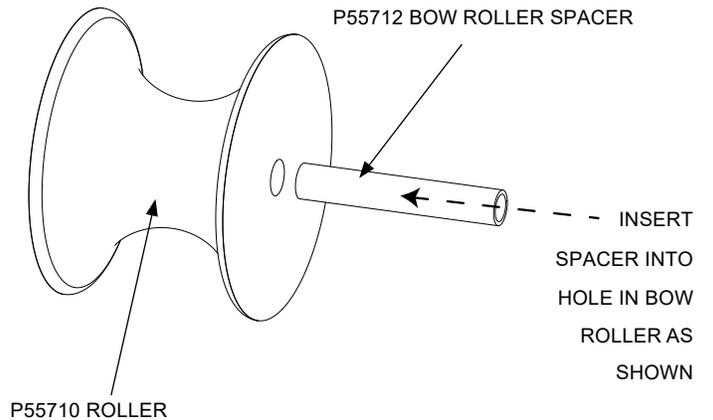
ASSEMBLING SPACER INTO ROLLER
